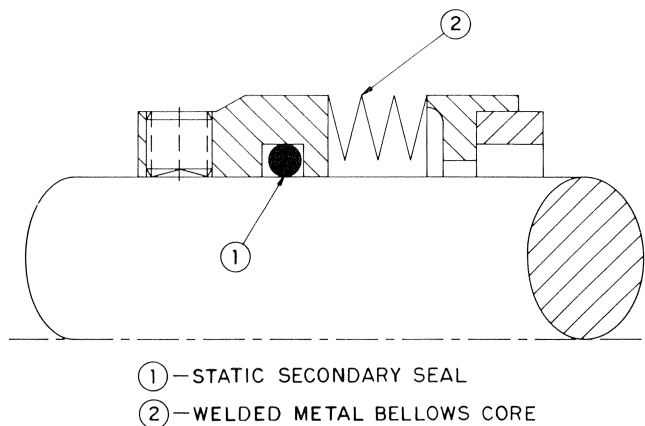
Typical Welded Metal Bellows Seal.
